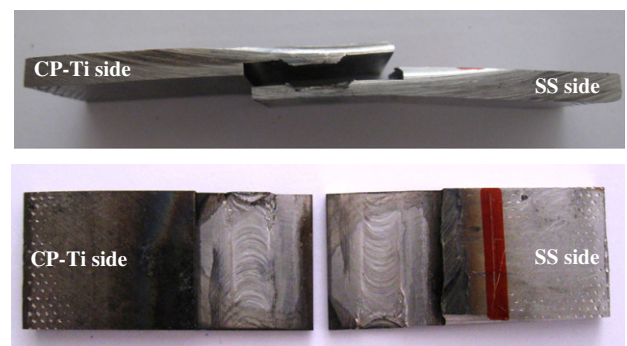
Fractured parts of the lap joint of CP-Ti/304 SS produced using tool rotation and advancing speeds of 1100 rpm and 50 mm/s, respectively. The fracture occurred at the interface layer, (a) cross view, (b) top view.
